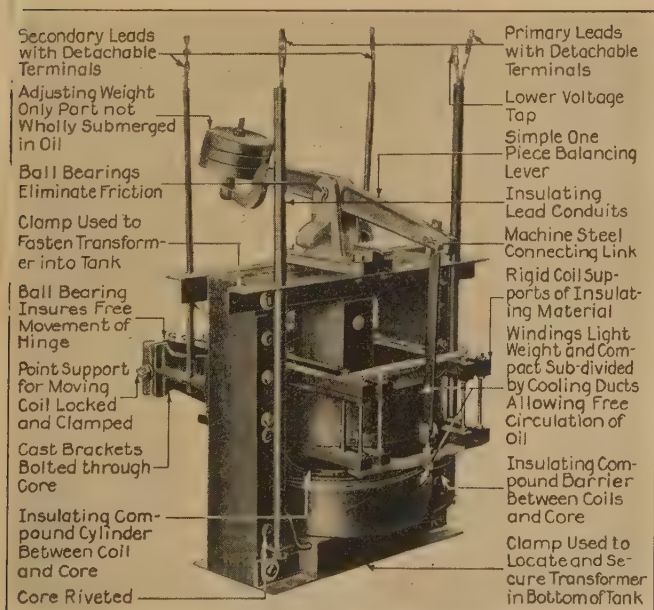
Subway-type RO constant-current transformer, with tank removed.
